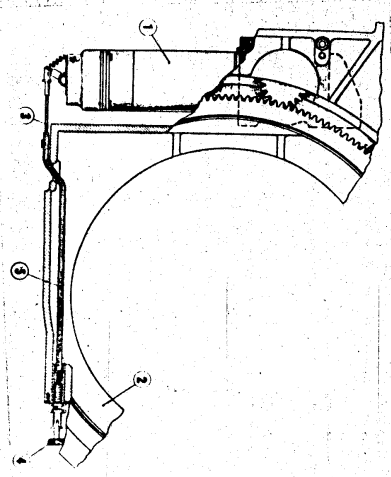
Azimuth Drive Motor Clutch Unlocking Mechanism.
